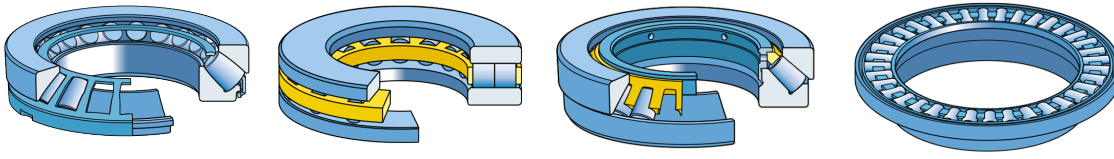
From left to right: spherical, cylindrical, tapered and needle rollers thrust bearings [3].
